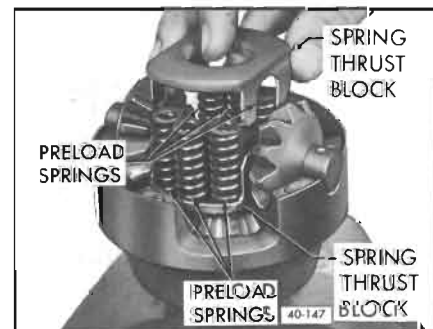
Installing Preload Springs and Second Thrust Block In Differential Case
